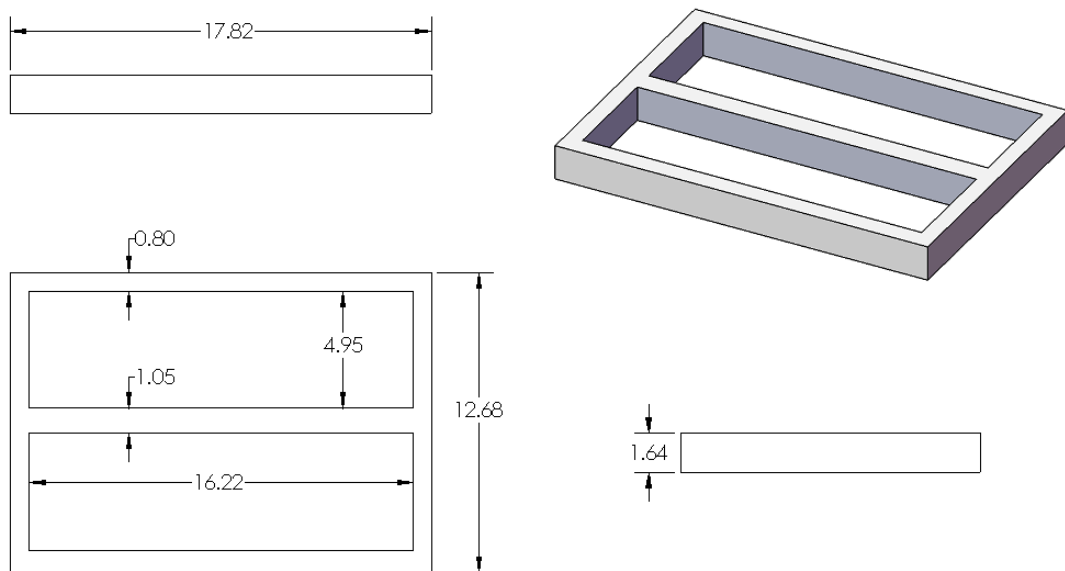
CAD drawing of the chassis (Dimensions in mm)
